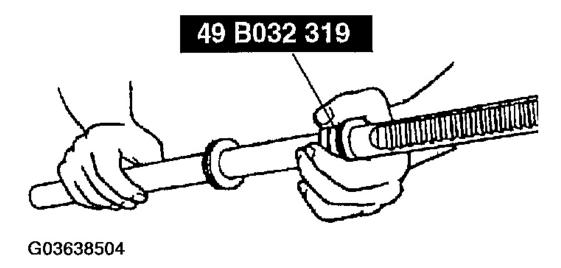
Placing Oil Seal And Inner Guide At Edge Of Steering Rack's Pinion Courtesy of MAZDA MOTORS CORP.
